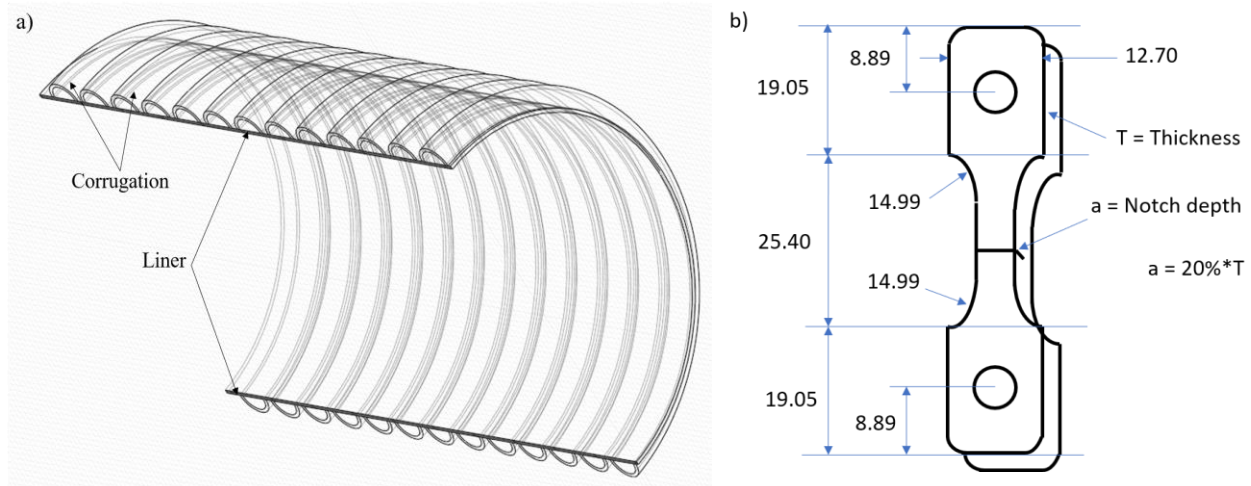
a) Sectional view of HDPE pipe b) Specimen geometry (mm)
